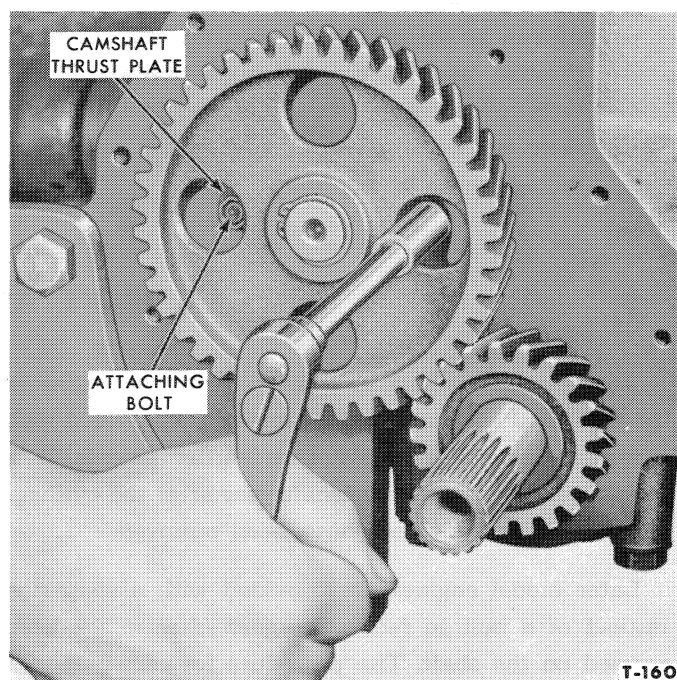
Removing Camshaft Thrust Plate Attaching Screws
